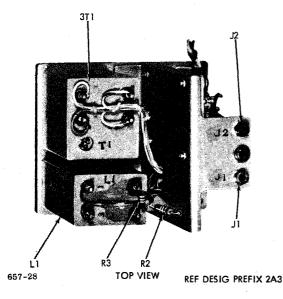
Bias Power Supply, Assembly 2A3, Test Points and Parts Location
